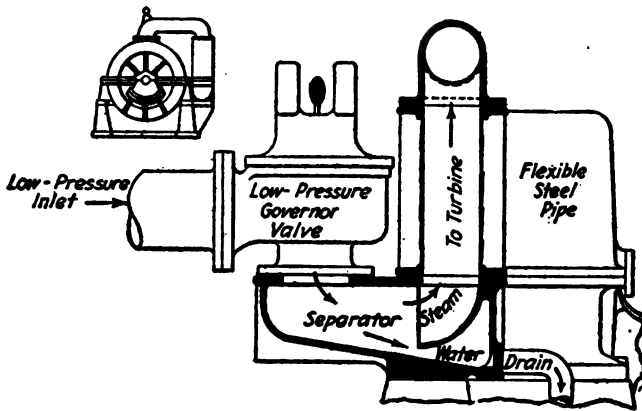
ARRANGEMENT OF LOW-PRESSURE STEAM INLET ON RETURN-FLOW TURBINE.
